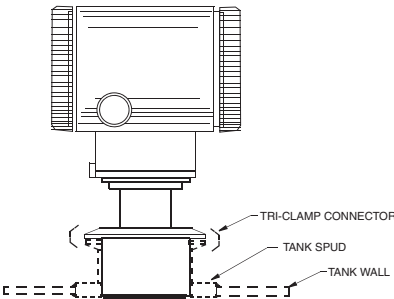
Mounting of Transmitter with Sanitary Mini Tank Spud Seal
